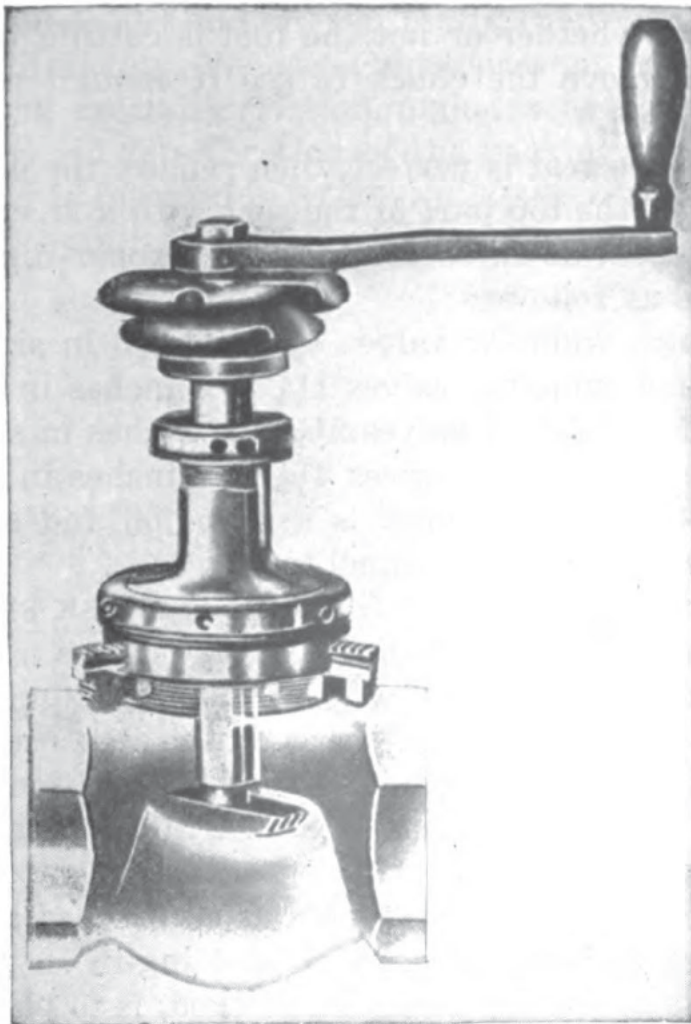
Hand reseating tool showing valve seat being refaced.
